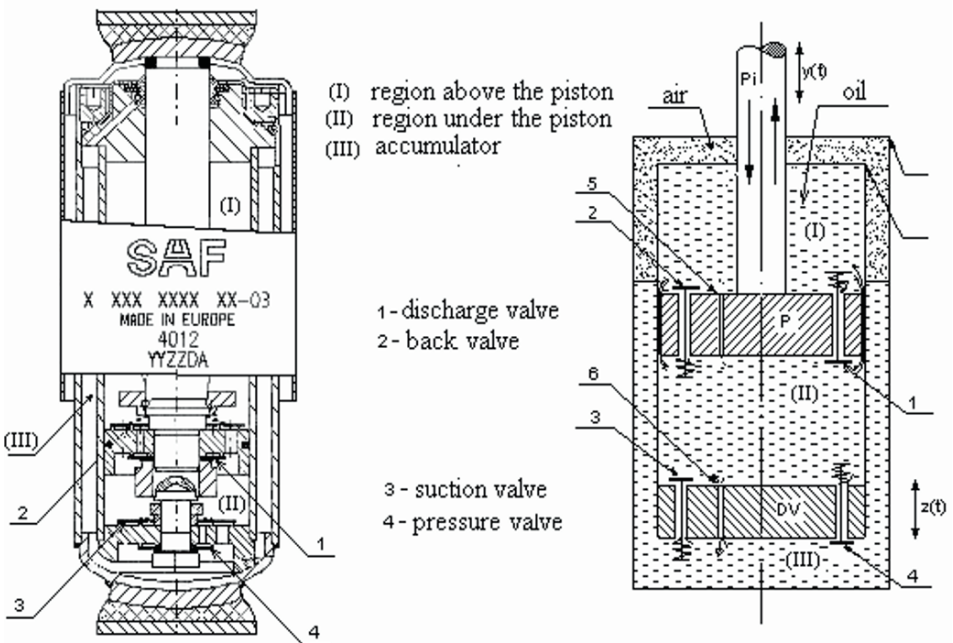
A damper cross-section view and scheme of corresponding damper model.
